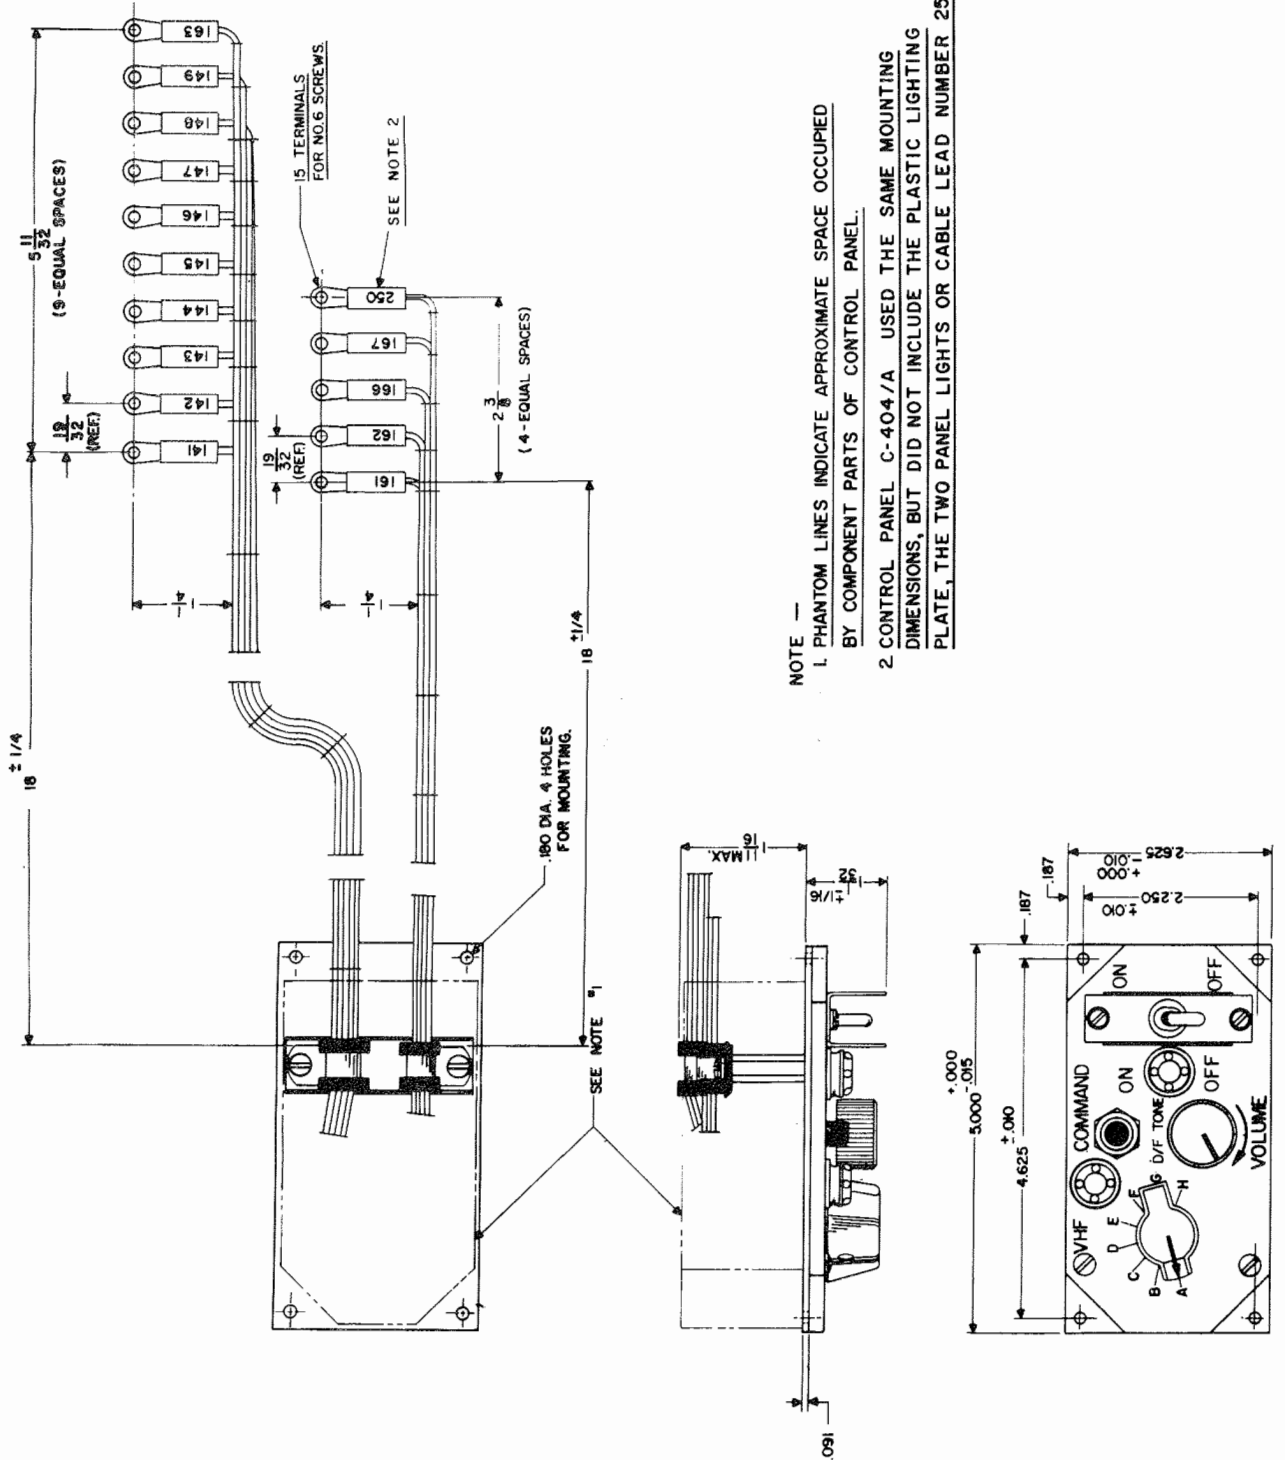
Control Box C-118/ARC-3 or C-118A/ARC-3—Outline Drawing and Mounting Dimensions
